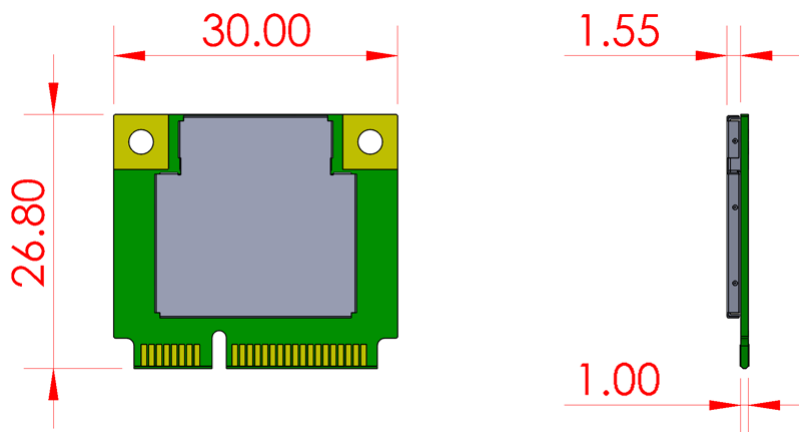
Mini PCIe Accelerator dimensions (in millimeters)
